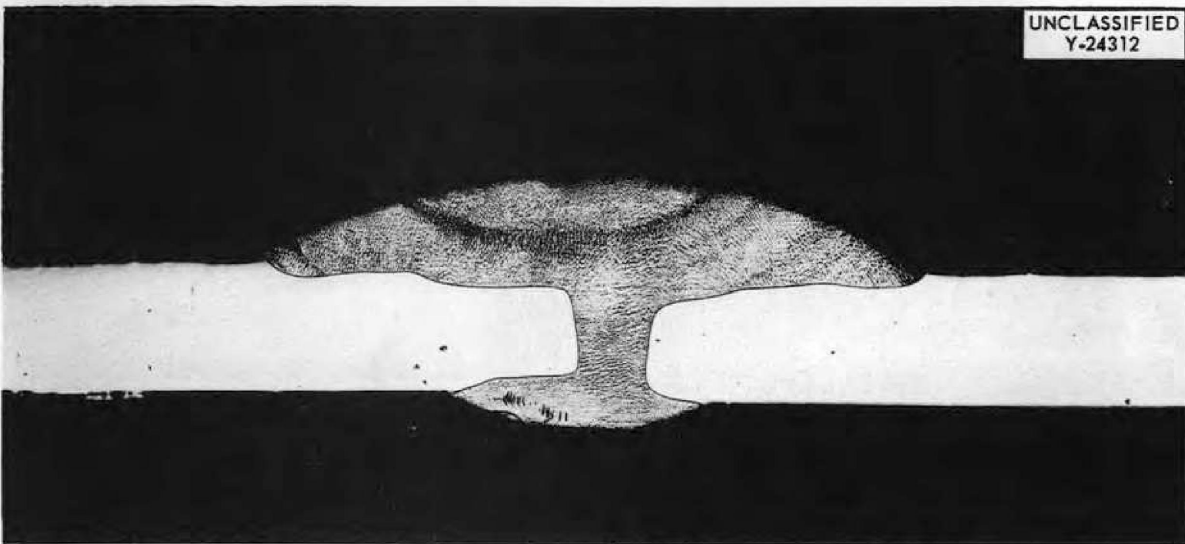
Sheet Niobium Butt Weld Made by Using 85% Zr-15% Nb Filler Wire. 22X.
